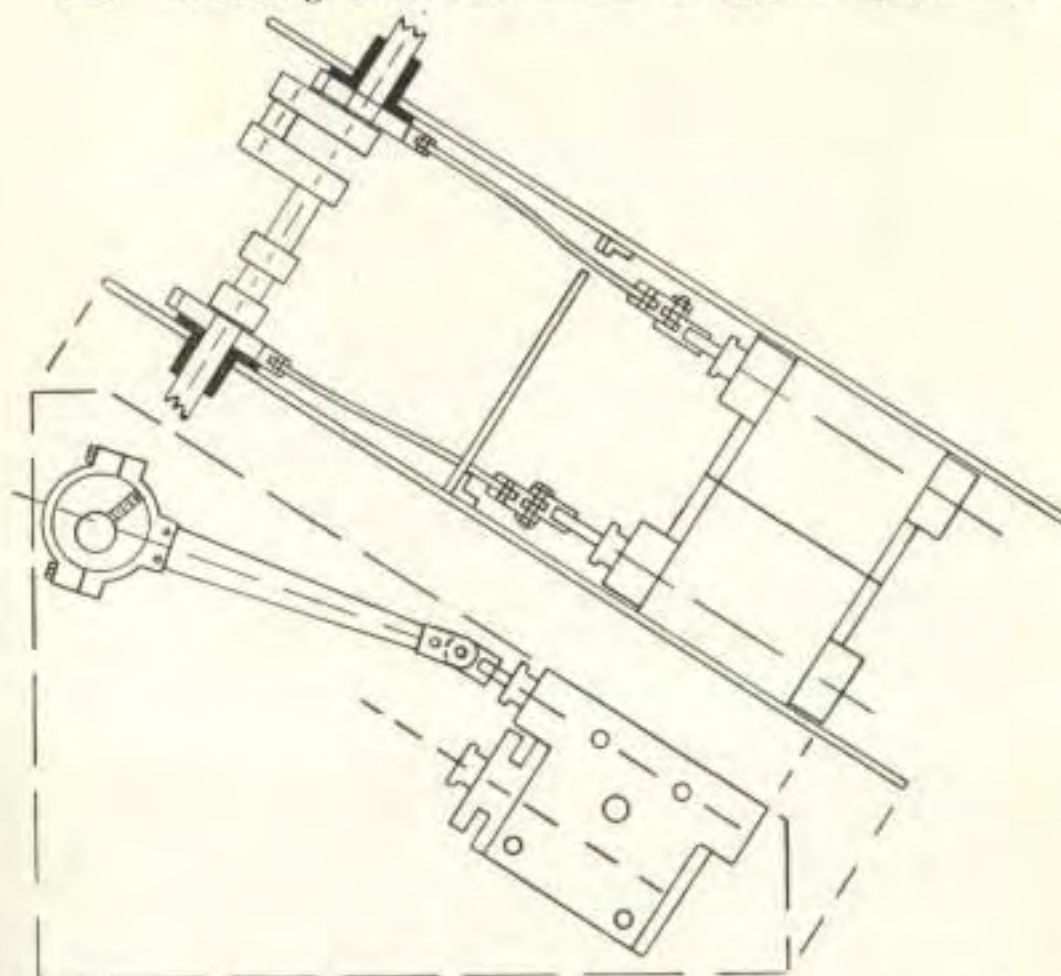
VALVE GEAR OF MODEL PADDLER'S ENGINE
